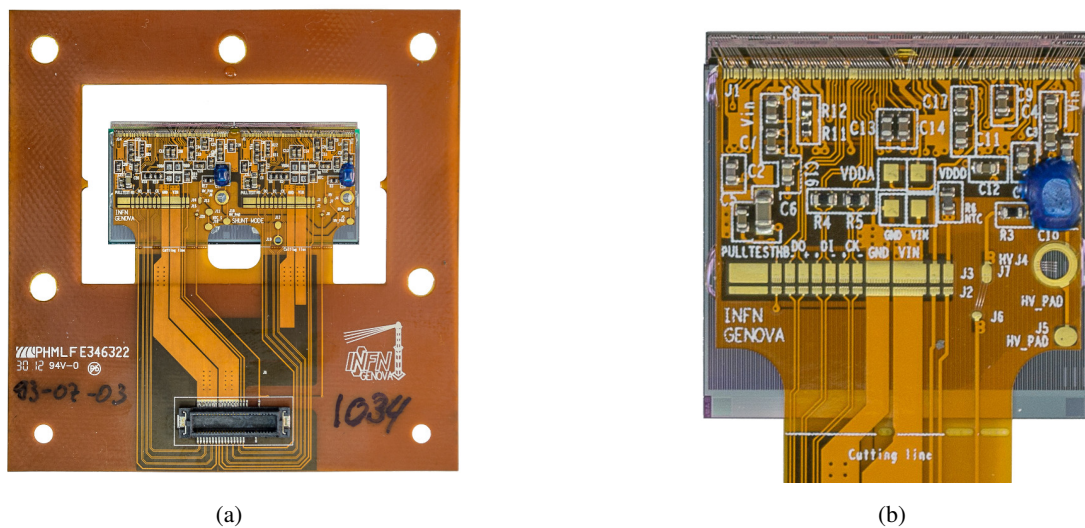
Modules of the IBL. (a): double chip module with handling frame and module connector, (b) magnification of a single chip module with FBK 3D-sensor. VDDA/VDDD pads are used to sense the regulator output voltage.
